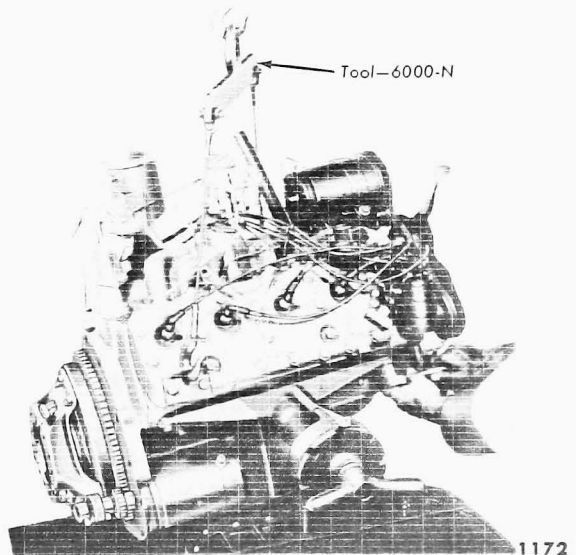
Mounting 254 Cu. In. Engine on Work Stand
